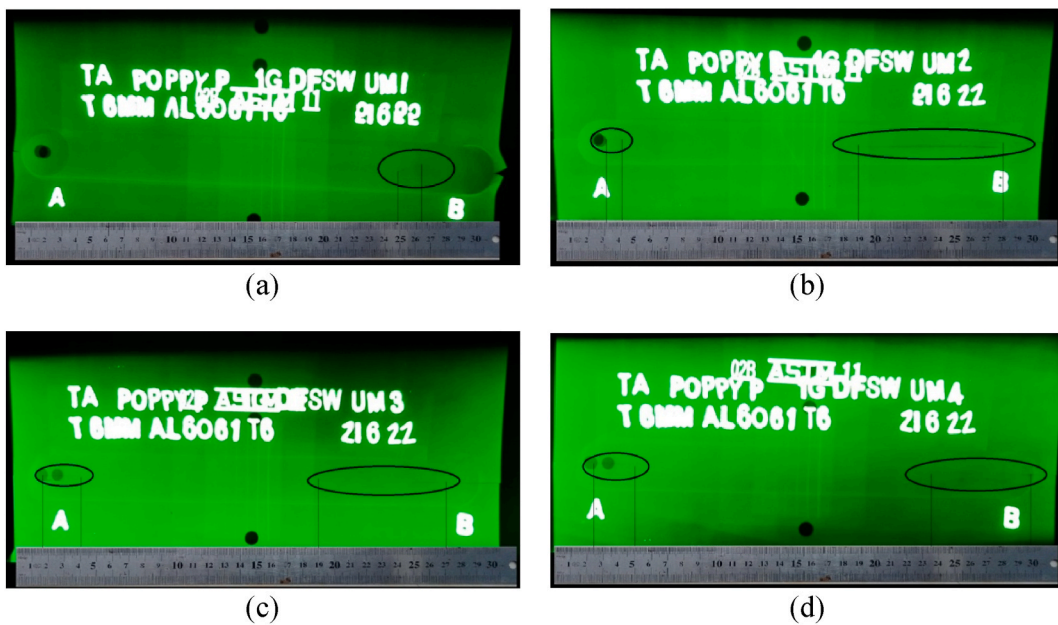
Radiography Test shooting results (a) specimen A, (b) specimen B, (c) specimen C, (d) specimen D.
